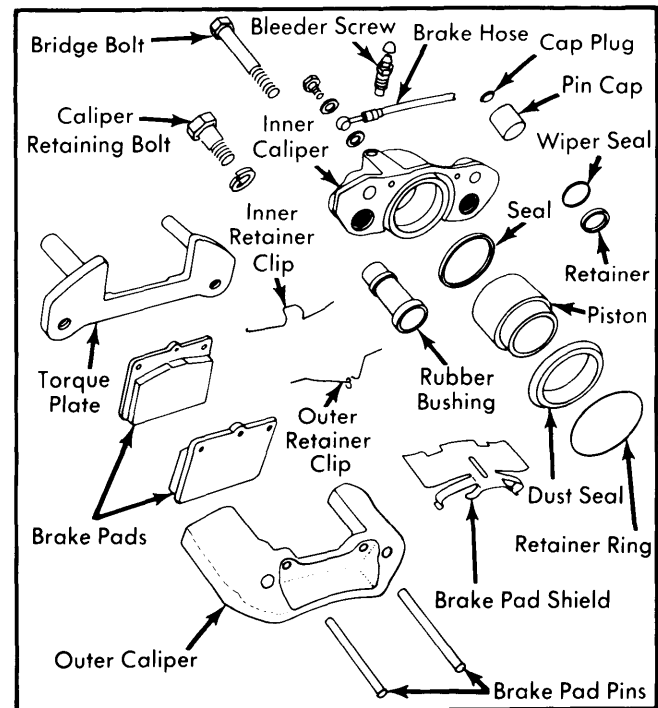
Exploded View of CVCC Station Wagon Disc Brakes
